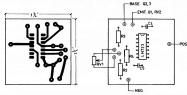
CIRCUIT BOARD AND COMPONENT LAYOUT
